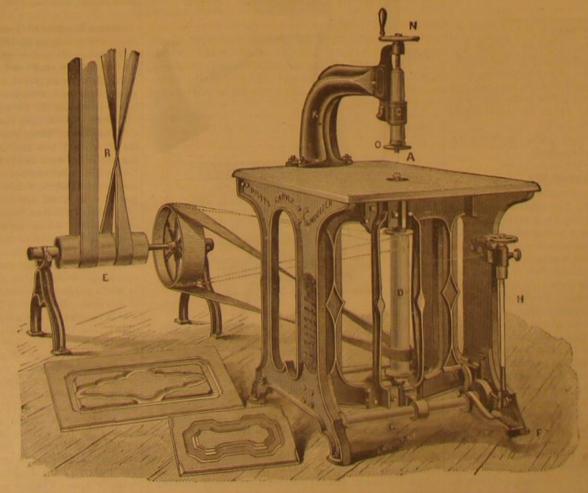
BOULT'S MOULDING, CARVING, AND PANELING MACHINE.
